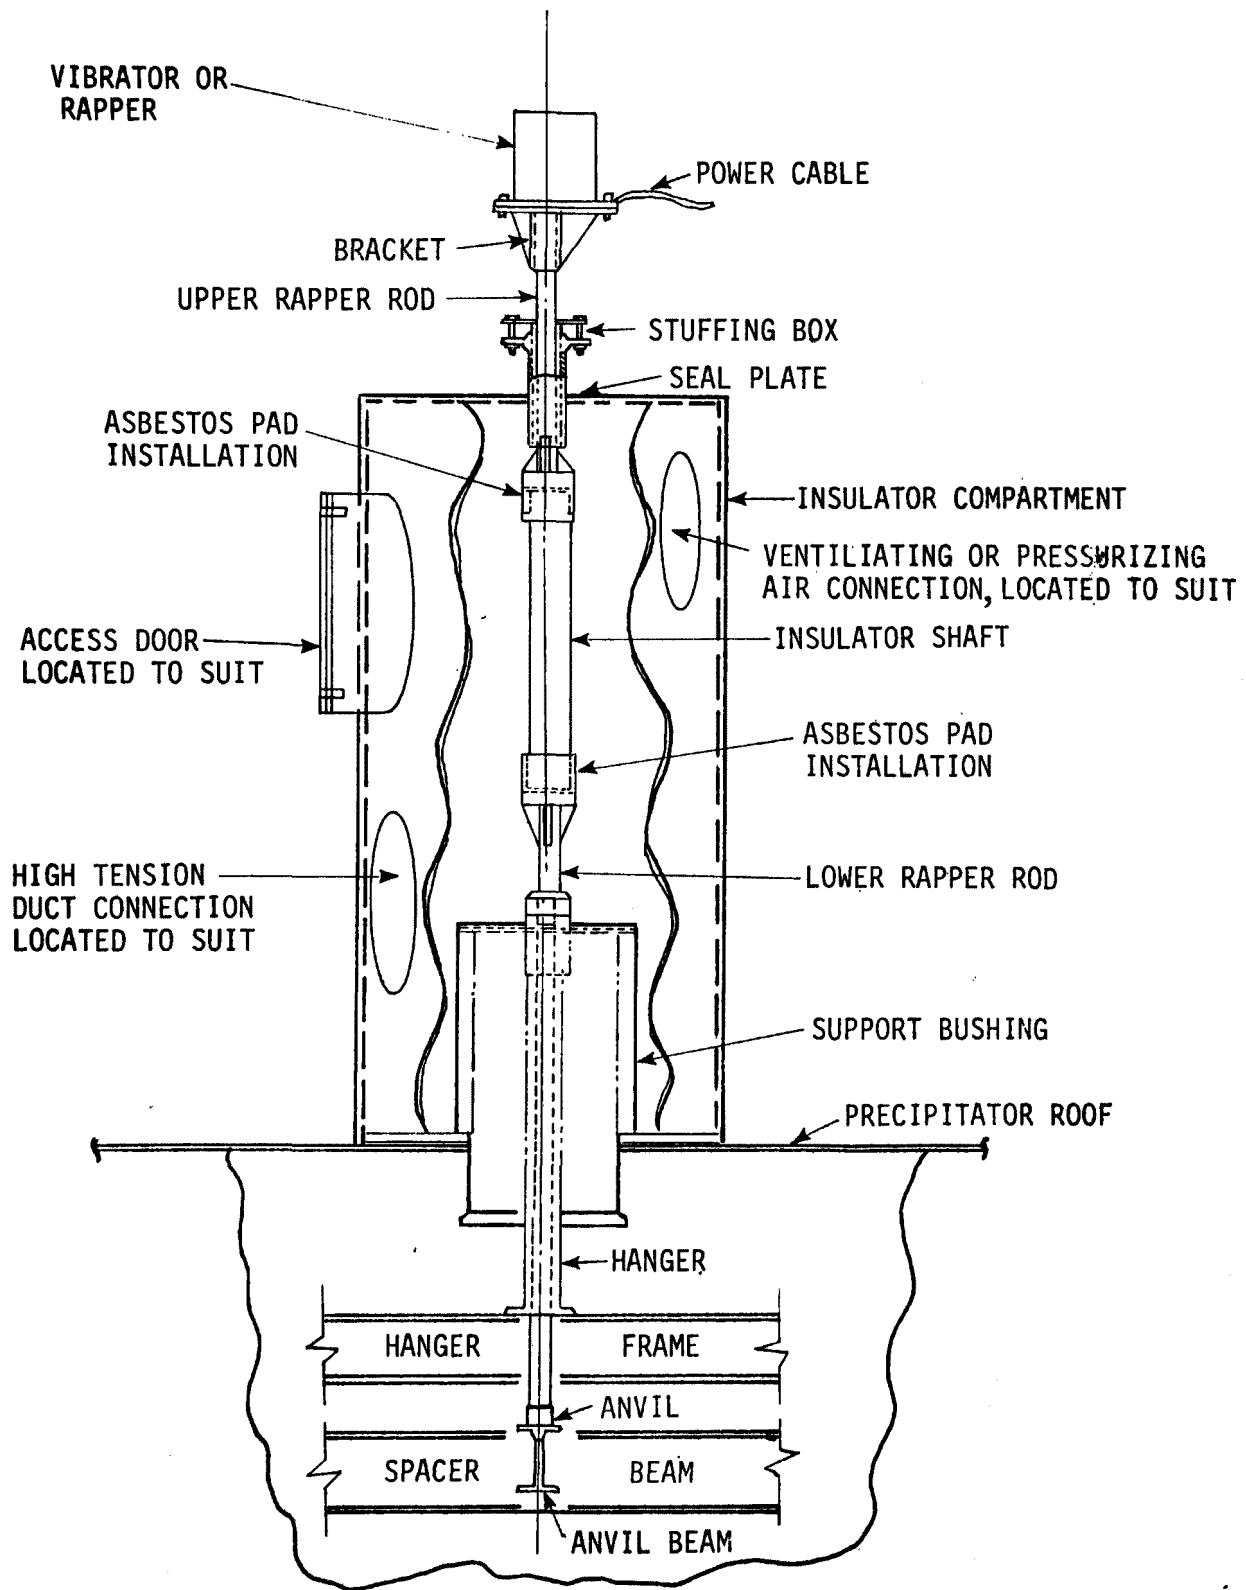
Typical precipitator insulator compartment and cleaning assembly..
